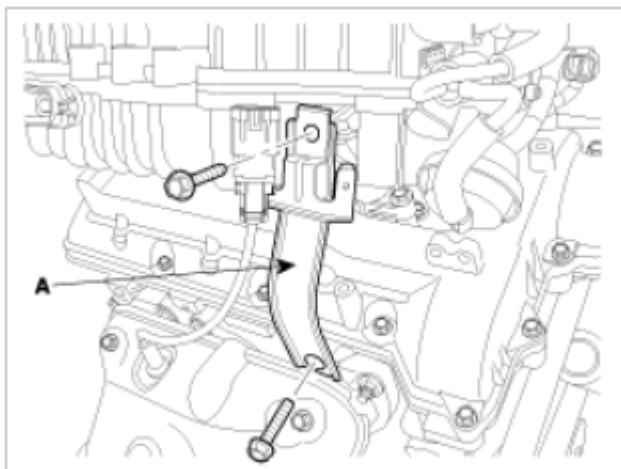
Identifying Surge Tank Stay With Mounting Bolts
